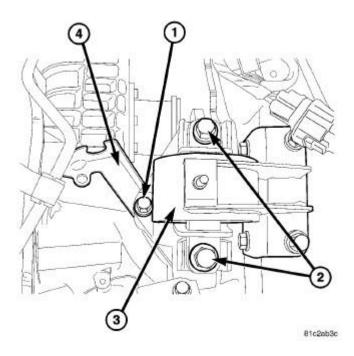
Right Engine Mount Bolts Courtesy of CHRYSLER LLC
